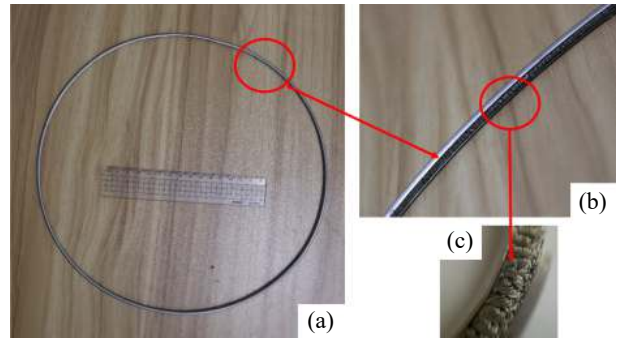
O-shape metal rubber seal with large ring diameter ratio
